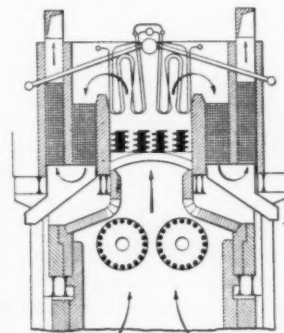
ATMOS BOILER WITH TWO SQUIRREL-CAGE ROTORS
